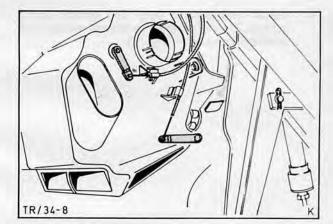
Detach bowden cables from heater housing and air flap valve levers
